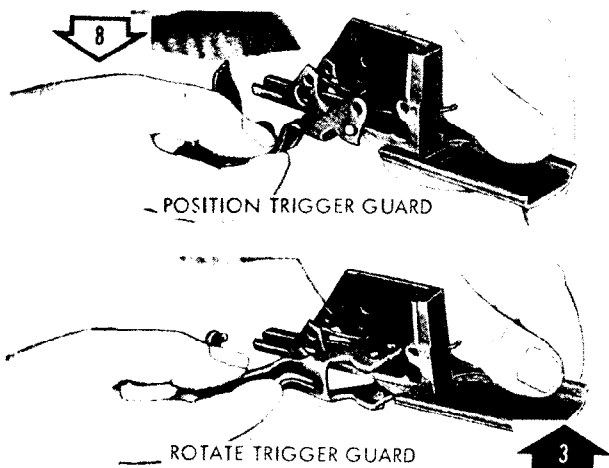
Disassembly/assembly of trigger housing assembly. (1 of 2)
